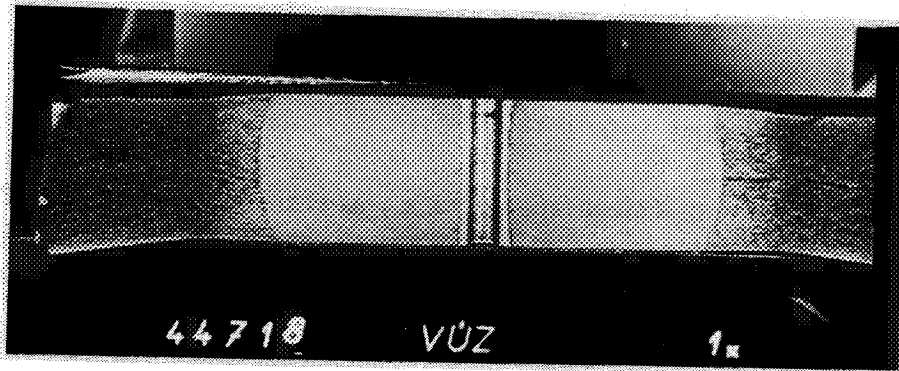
Fracture surface of a base metal, constant amplitude loading CCT specimen.
